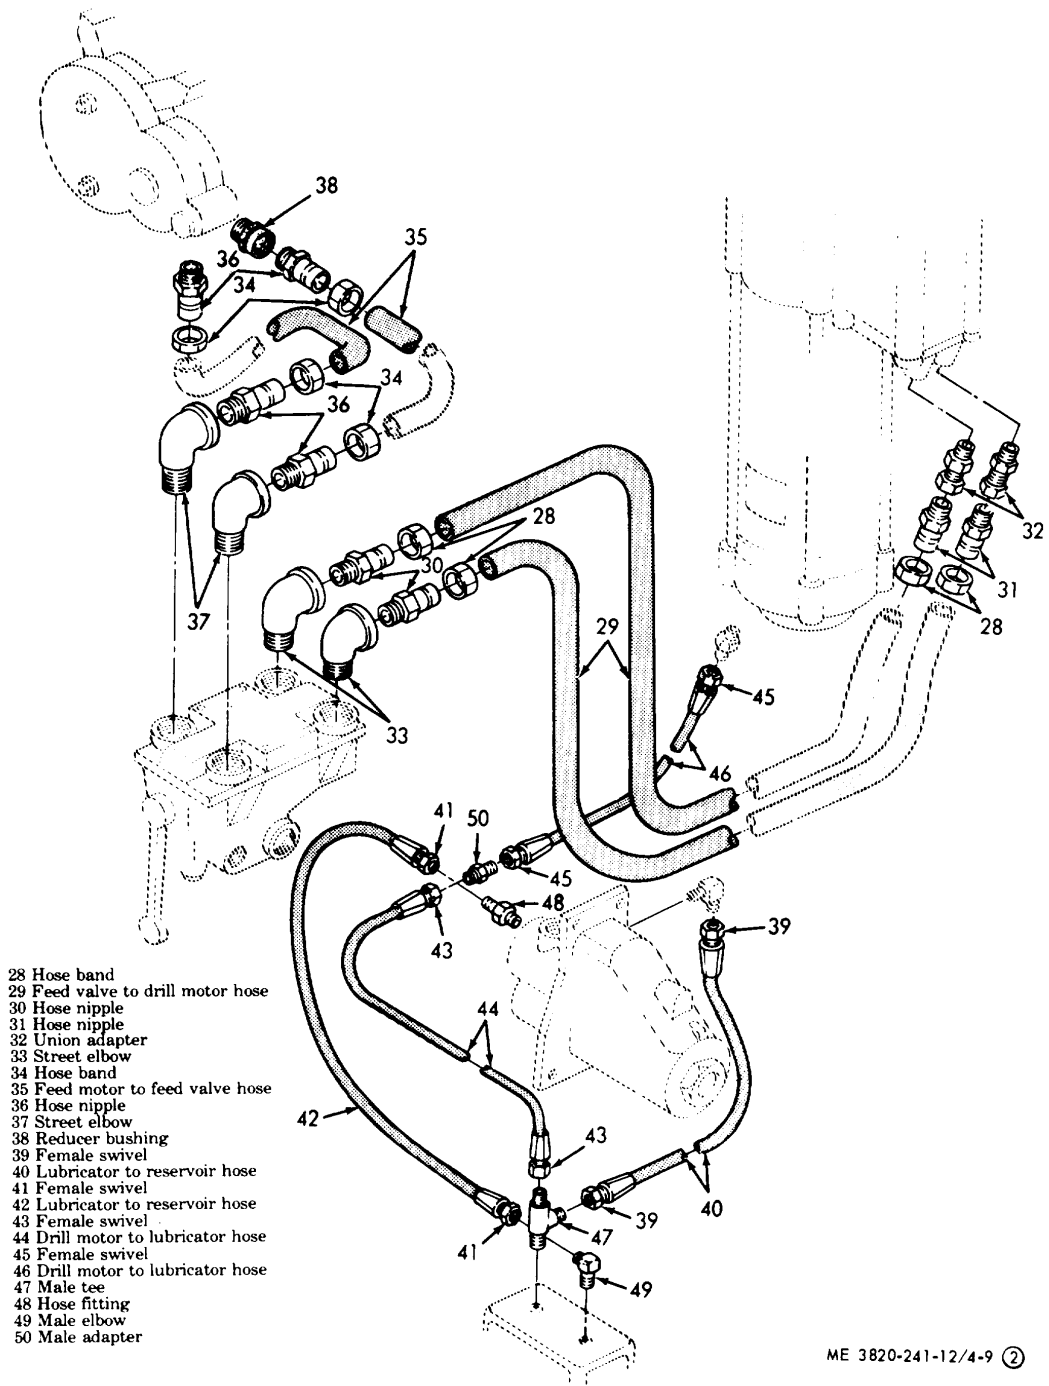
Rock drill pneumatic hoses and fittings, removal and installation (sheet 2 of 4).
